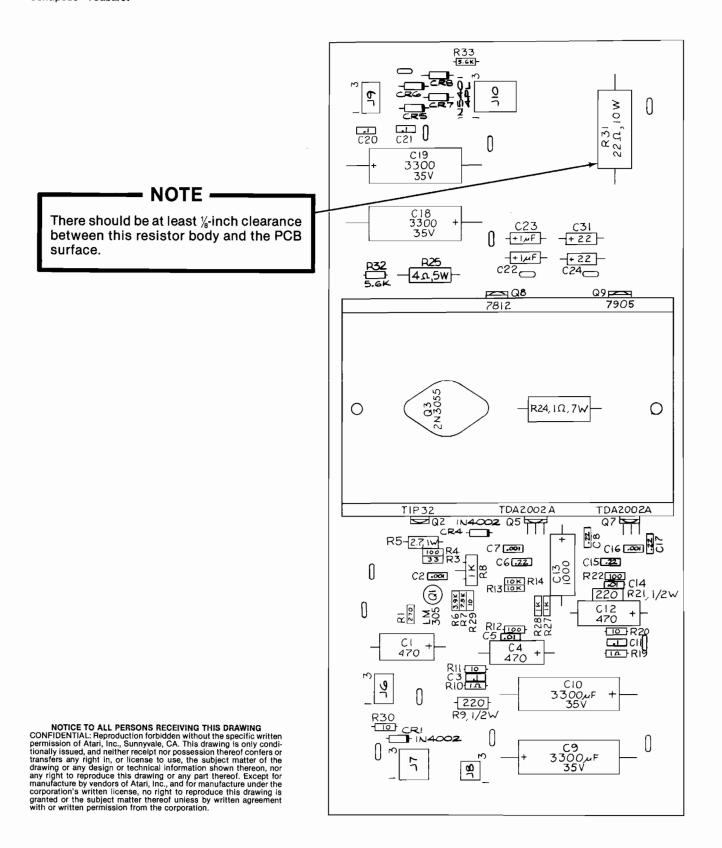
Regulator/Audio II PCB Assembly A035435-02 F
